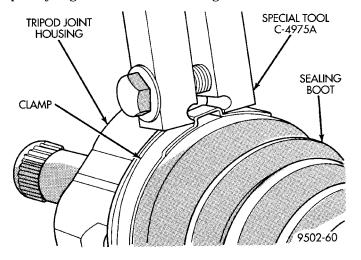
Crimping Tool Installed on Sealing Boot Clamp
